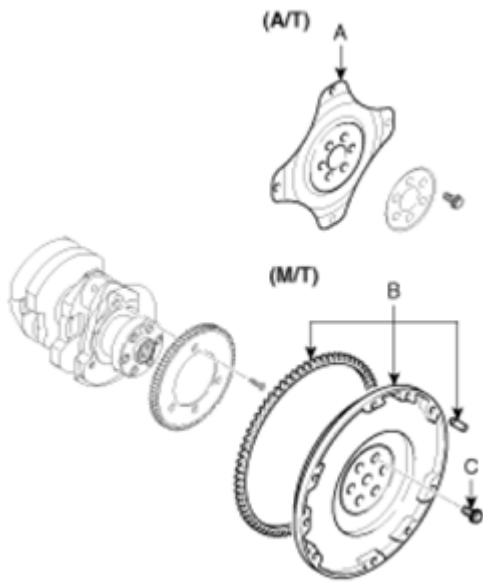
Identifying Drive Plate (AT Only) Or Flywheel (MT Only)
